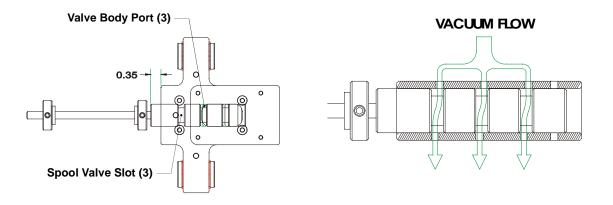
Feeder vacuum valve assembly illustrating the location of the spool assembly when the shuttle feed plate has attained its fully back position. Side view shows vacuum flow from the top to the lower valve body port when spool valve slots are properly centered along the ports. End port shown is the vent port which is completely blocked by the spool. To Adjust the Front Spool Stopper (Vacuum ON setting)
